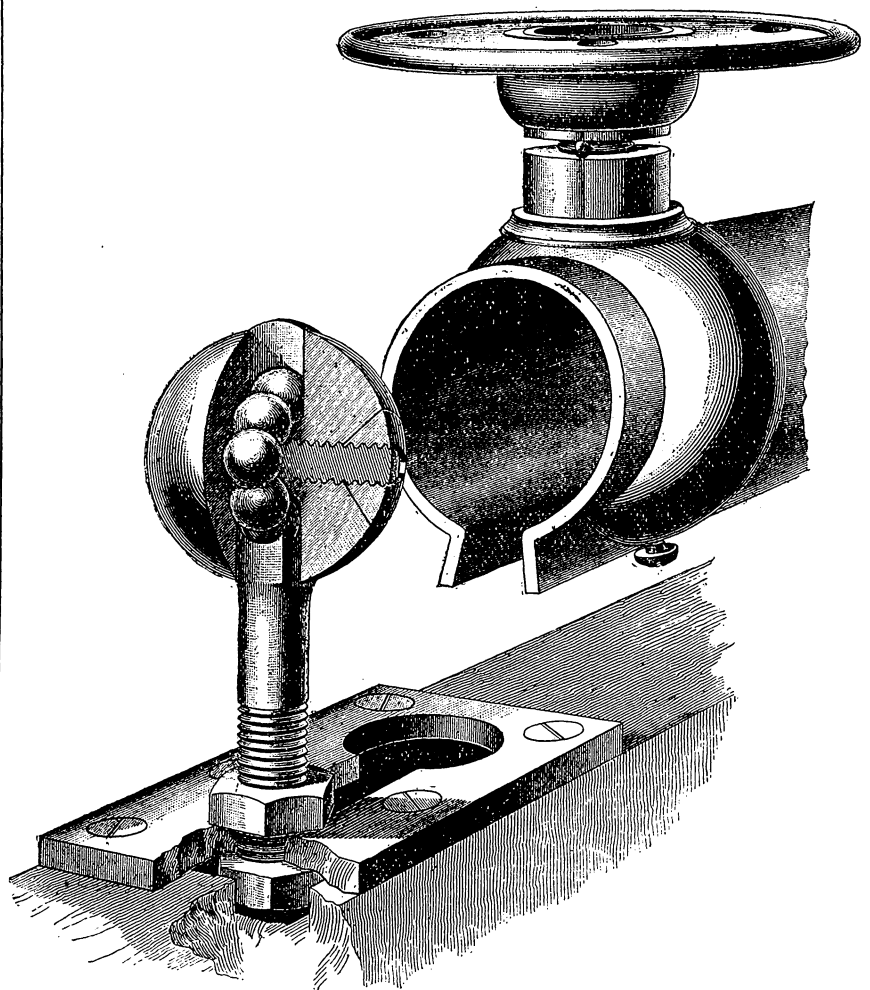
The McCabe Ball Bearing Tubular Door Hanger.
